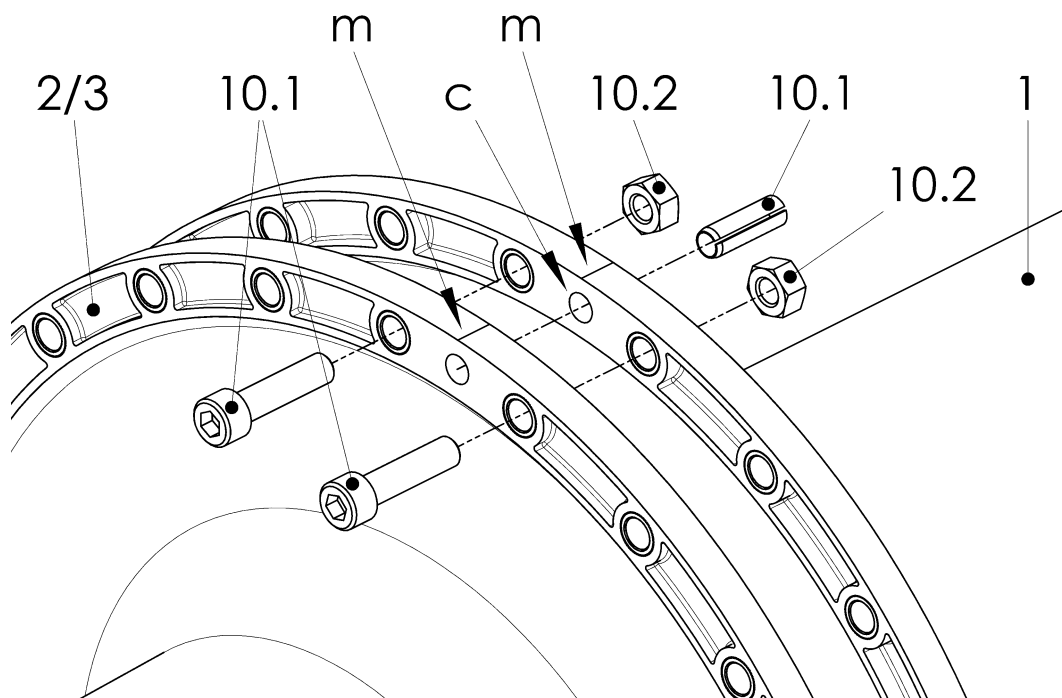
Coupling sizes 2 and 4: Mounting the tube to the membrane
